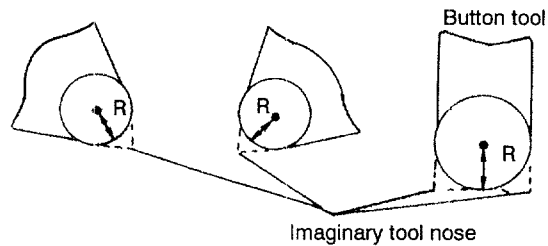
Setting the Nose R Offset Amount and Imaginary Tool Nose
